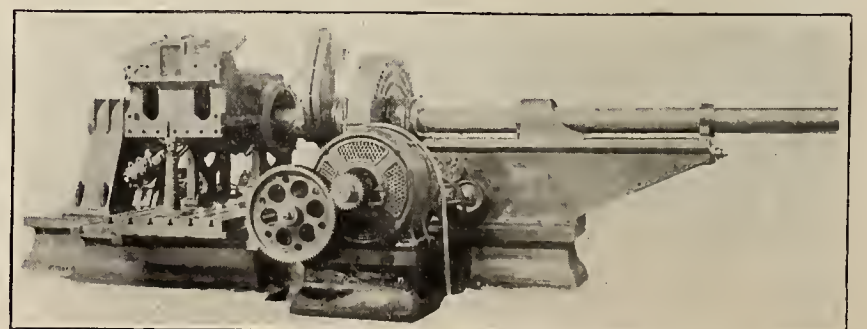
BARRAT CYLINDER BORING MACHINE, DRIVEN BY WESTINGHOUSE D. C. MOTOR.
